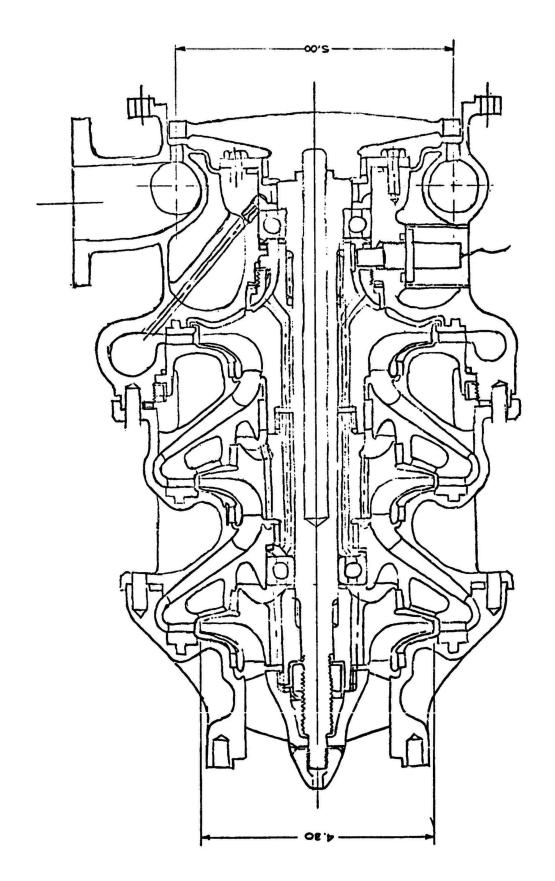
AMPT Fuel Turbopump Three-Stage Pump Preliminary Drawing Used for Configuration Selection
